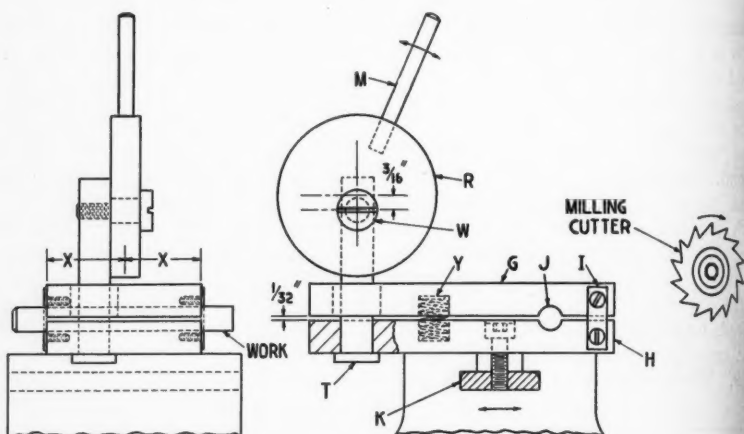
Assembly Drawing of Cross Slide Fixture for Milling Flat on a Shaft Section
